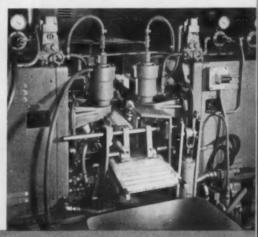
Specially tooled 30 kva. bench welders join two stampings with 38 welds.
